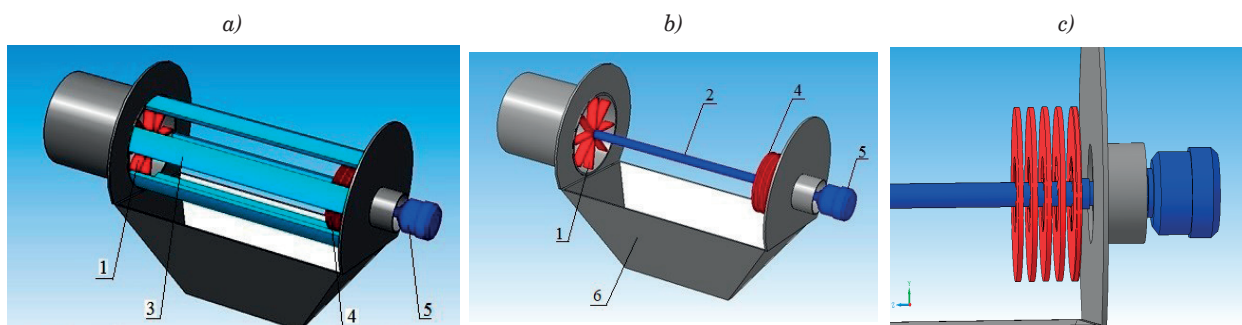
The scheme of the developed rotary cyclone design elements: 1 - impeller; 2 - shaft; 3 - lower separator plates; 4 - multi-disc pre-cleaner; 5 - electric motor; 6 - deposition chamber
